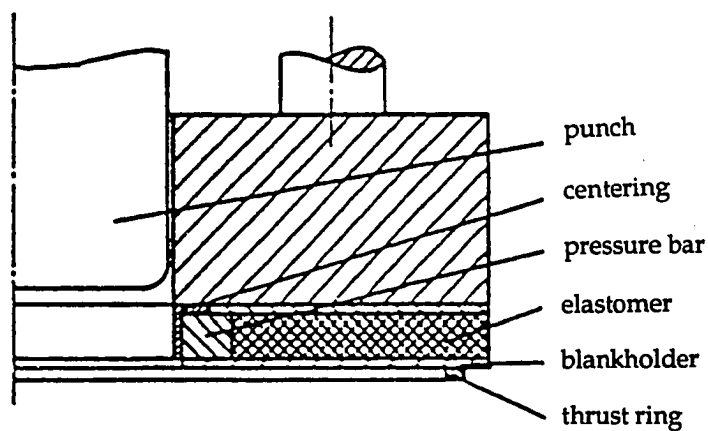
Flexible blankholder for deep drawing rectangular parts, [Doege, 1987].
